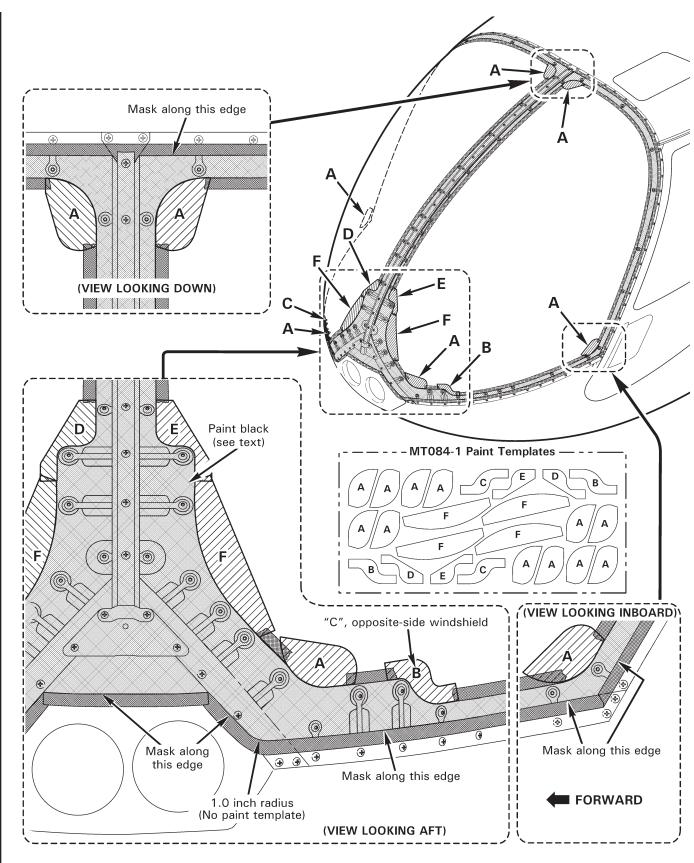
PAINT TEMPLATE LAYOUT
